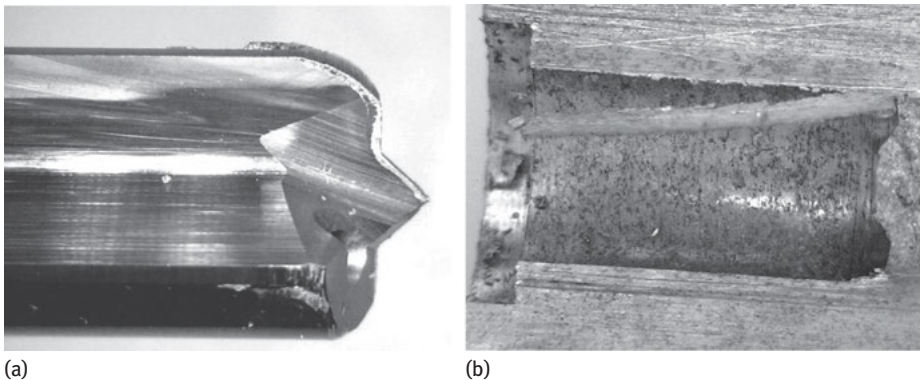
Excessive abrasive wear due to casting porosity: (a) appearance of a worn drill and (b) result of the autopsy of the machined hole.
